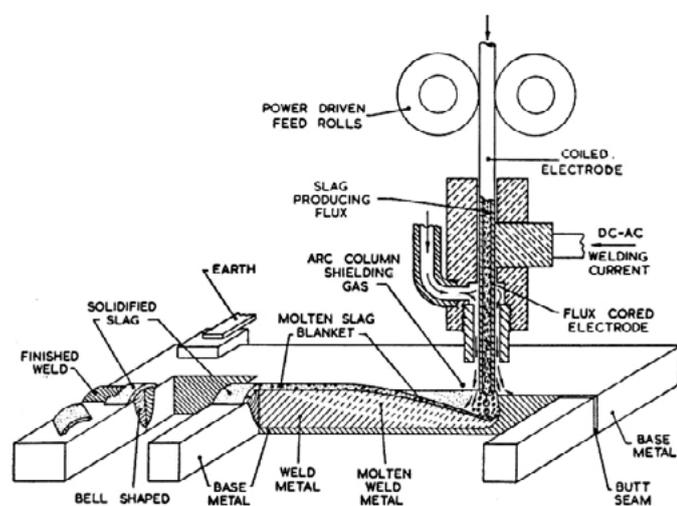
Schematic diagram of the welding method developed by A. Bernard [31]
